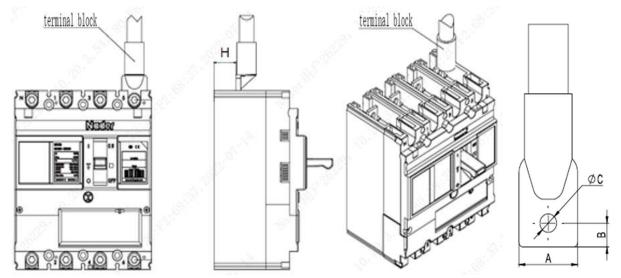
Connection diagram of copper bar in front of board or copper cable with wiring terminal
